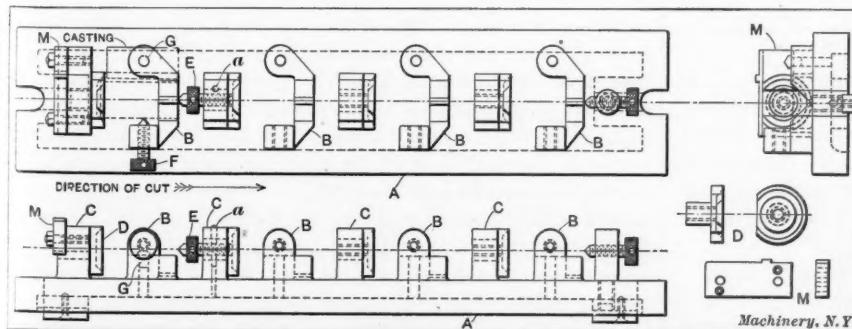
Fixture used in Milling the Casting shown in Fig. 1
